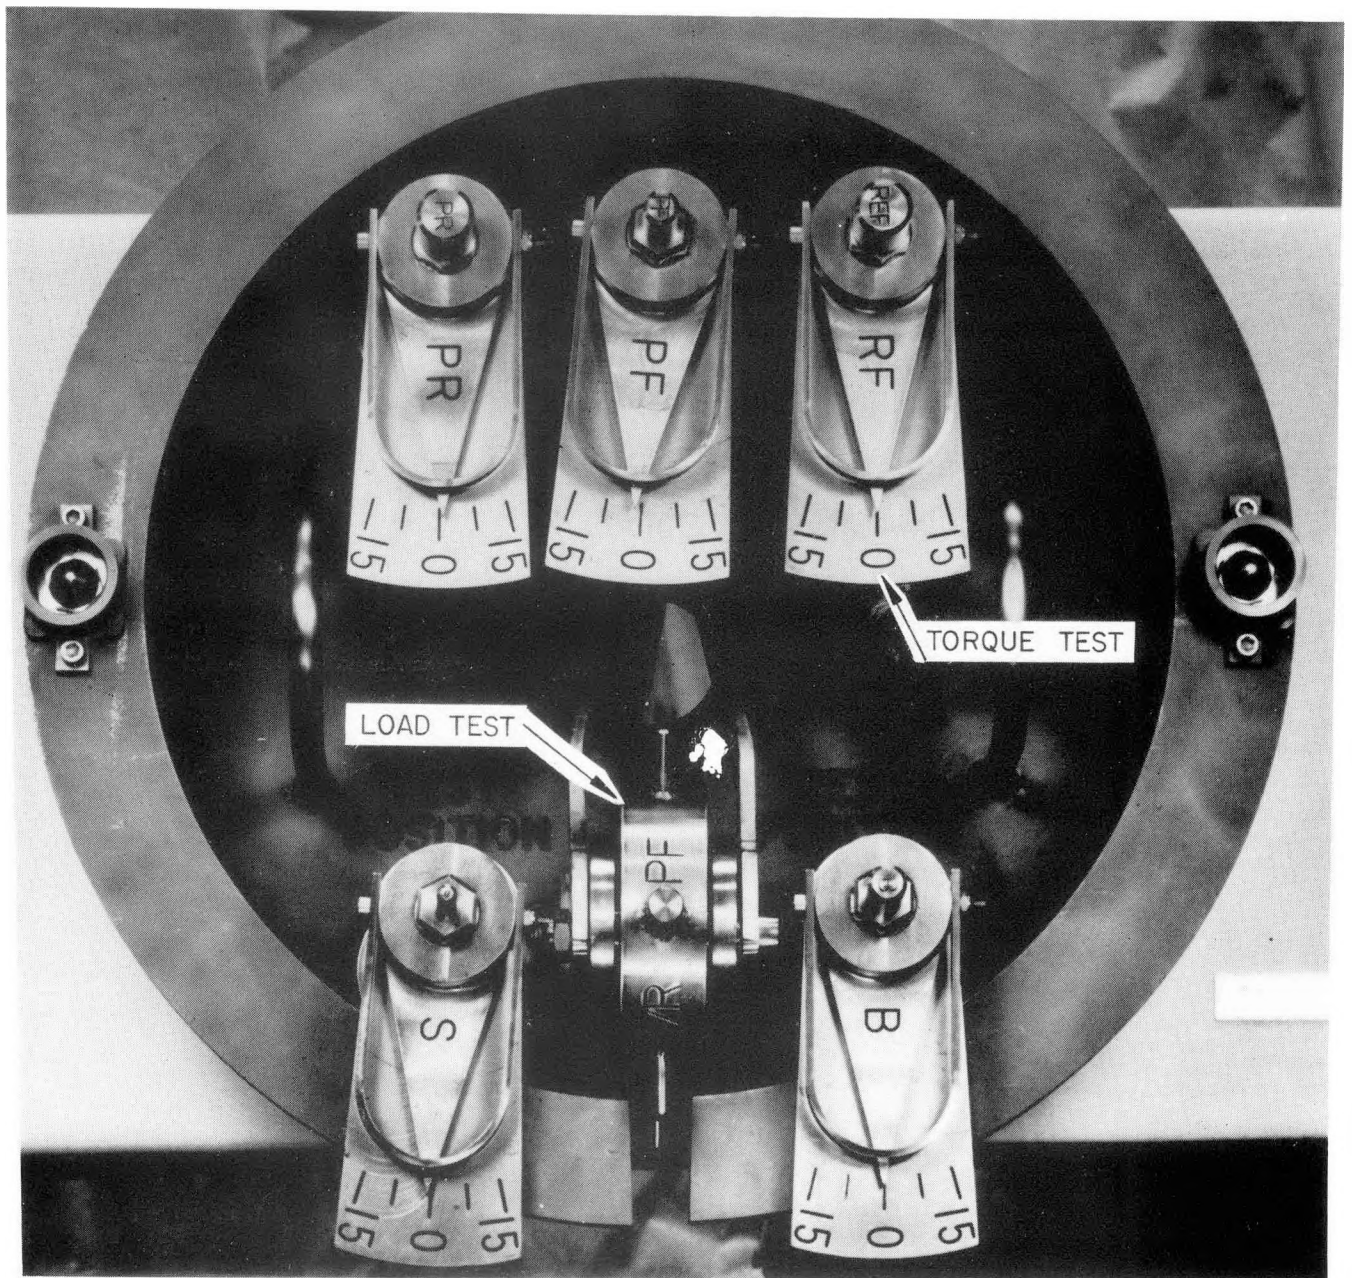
RRS Grapple Torque Calibration and Load Test Fixtures
